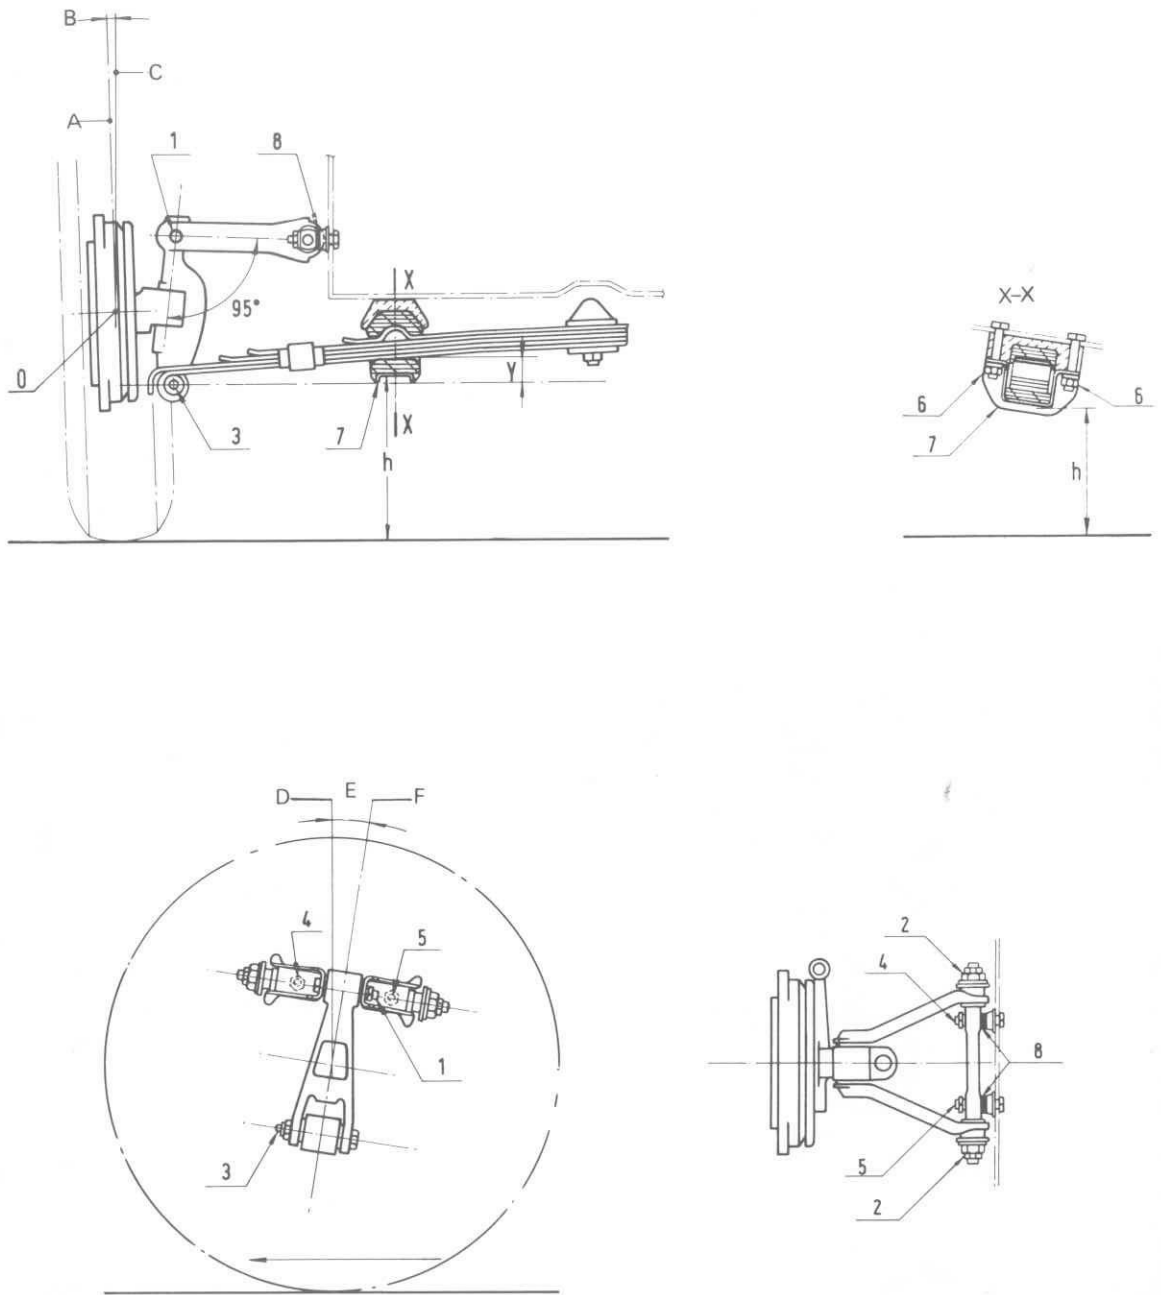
11 Diagrams for checking and adjusting camber and castor angles
